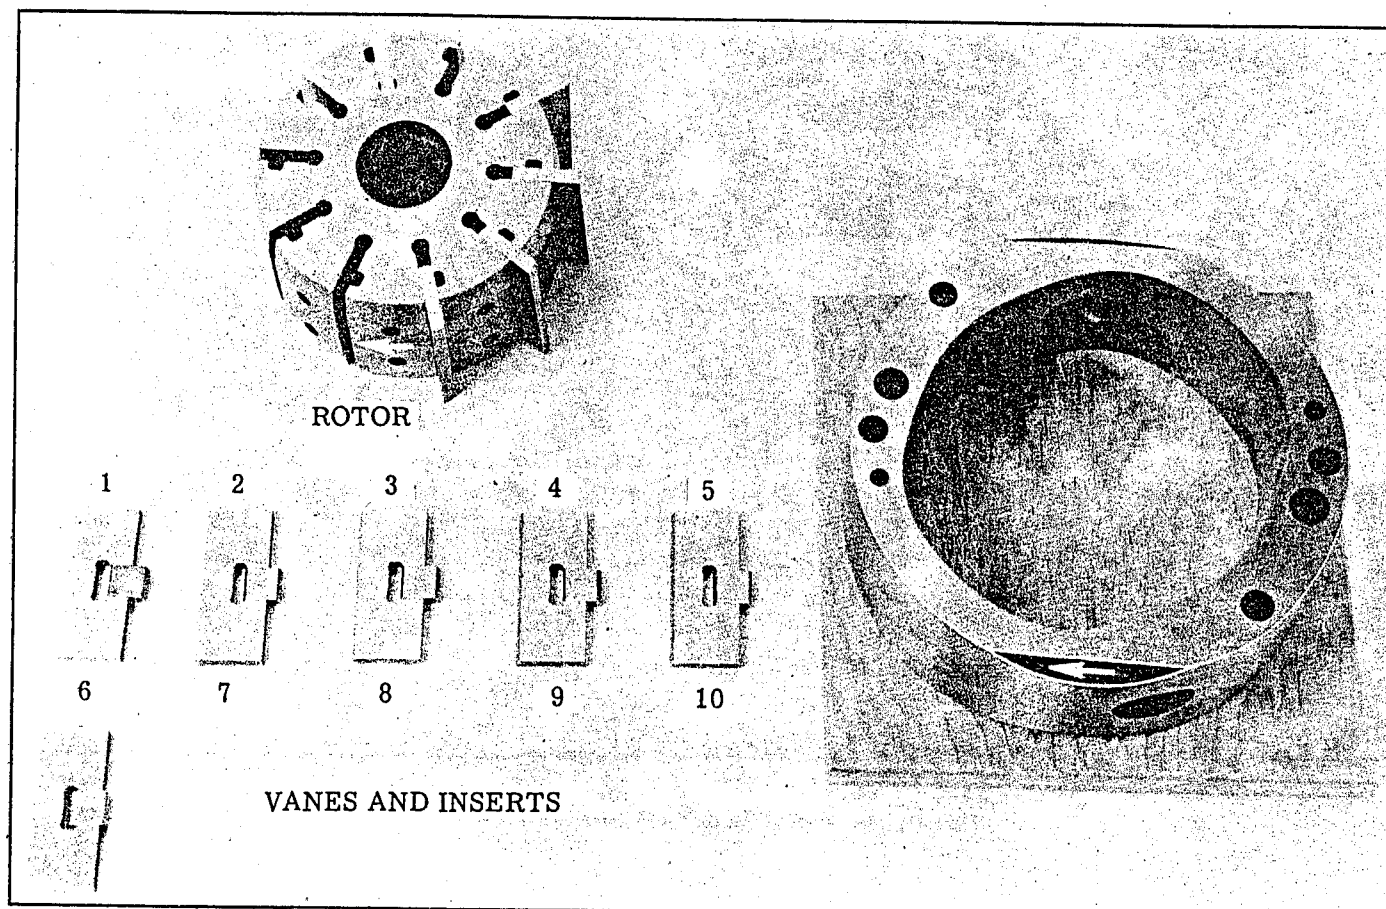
Sequential Removal of Vanes from Rotor. Starting at Arrow on Rotor.
